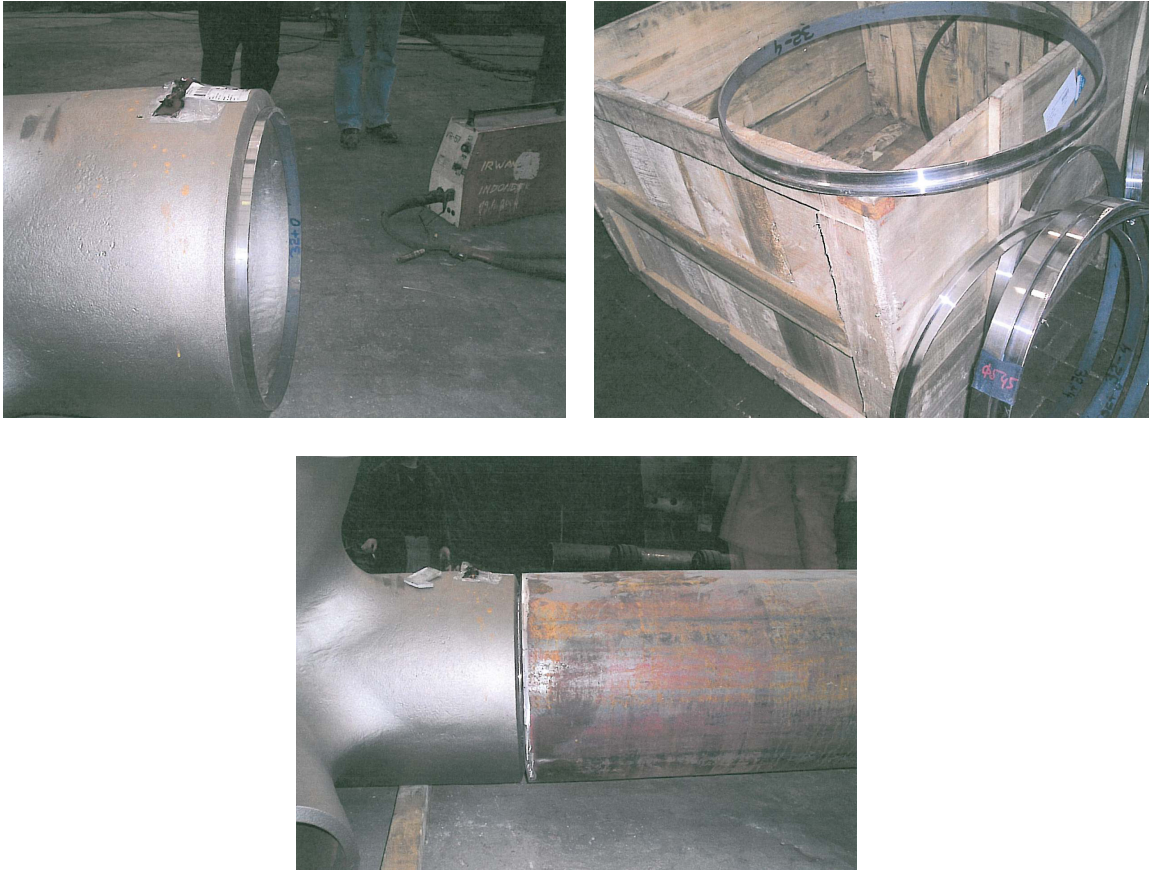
Details of the welded connection between steel tubes and cast steel node.
